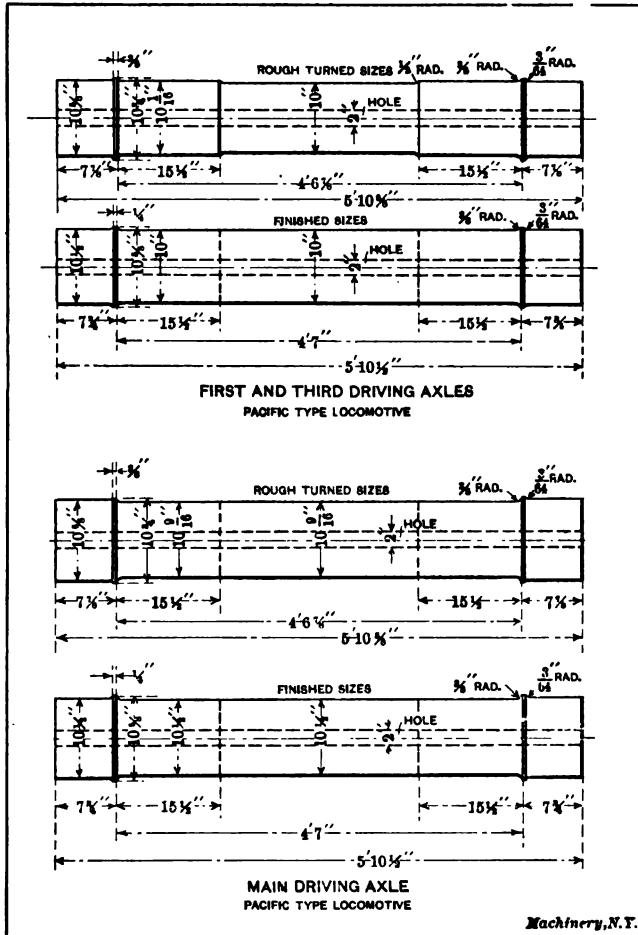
Rough and Finished Turned Dimensions for Driving Axles
